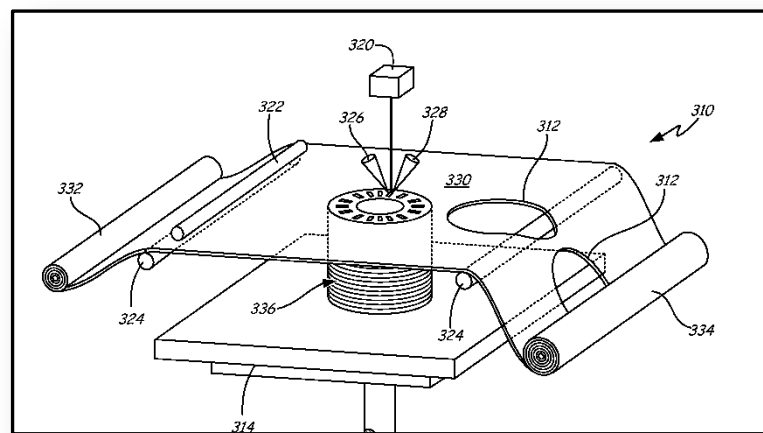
Patent drawing of 3D printed electric motor process using a sheet lamination method [114].
